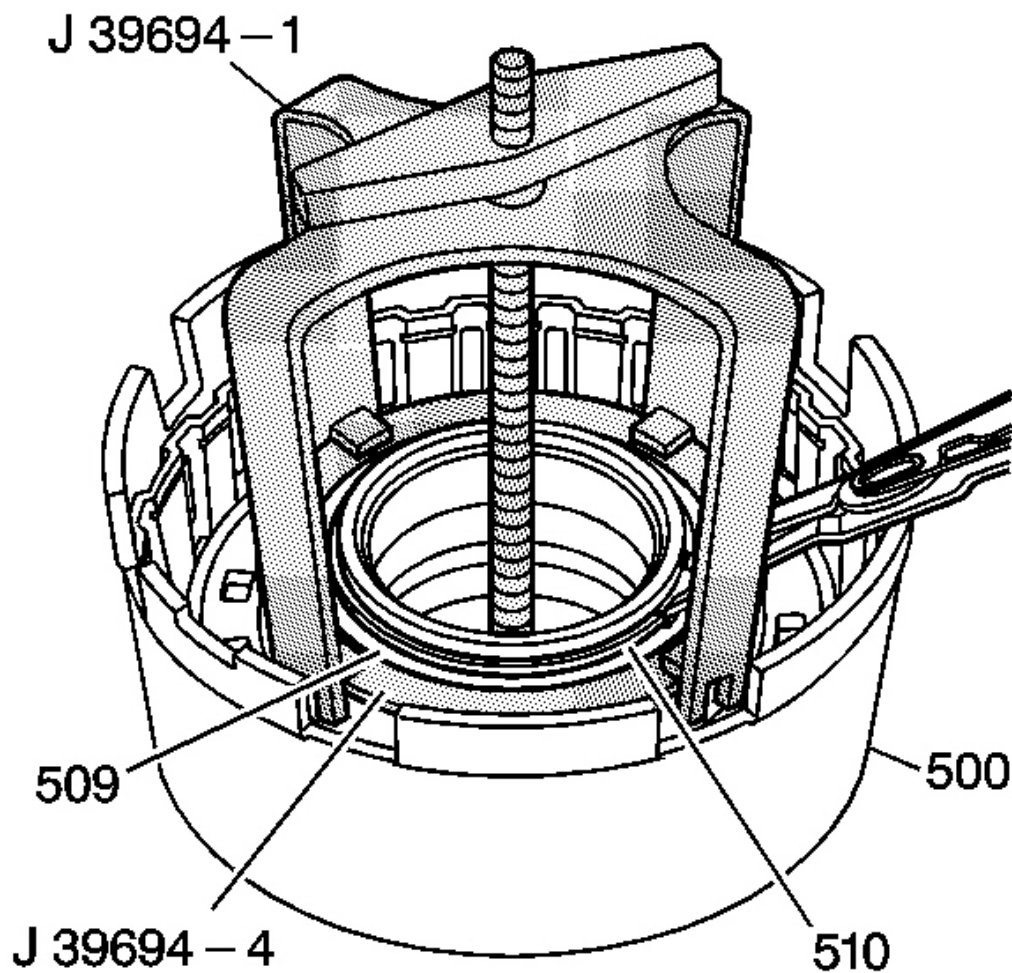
Compressing The Spring And Retainer Assembly Using J 39694
